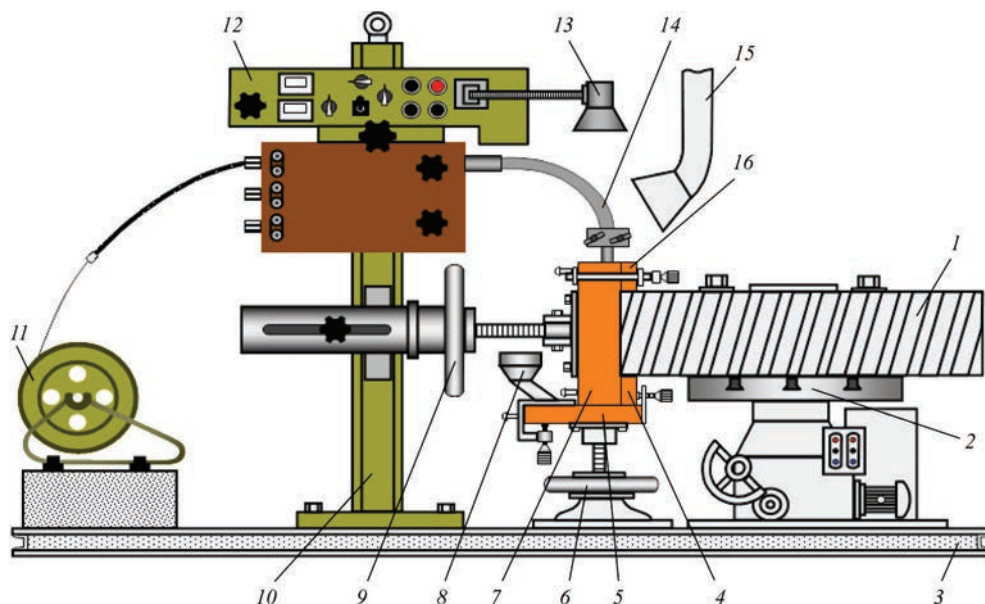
Scheme of installation for restoration of teeth of helical coarse pitch gear wheels by electroslag cladding: 1 — restored gear wheel; 2 — welded manipulator M1; 3 — floor plates; 4 — input technological strap; 5 — water-cooled bottom plate; 6 — device for movement and fixation of bottom plate; 7 — mold; 8 — siphon funnel; 9 — mechanism for suspension and movement of the mold; 10 — rail column; 11 — coil with electrode wire; 12 — machine A-535; 13 — lamp of illumination of cladding zone; 14 — special nozzle; 15 — fume exhaust system; 16 — initial technological strap
